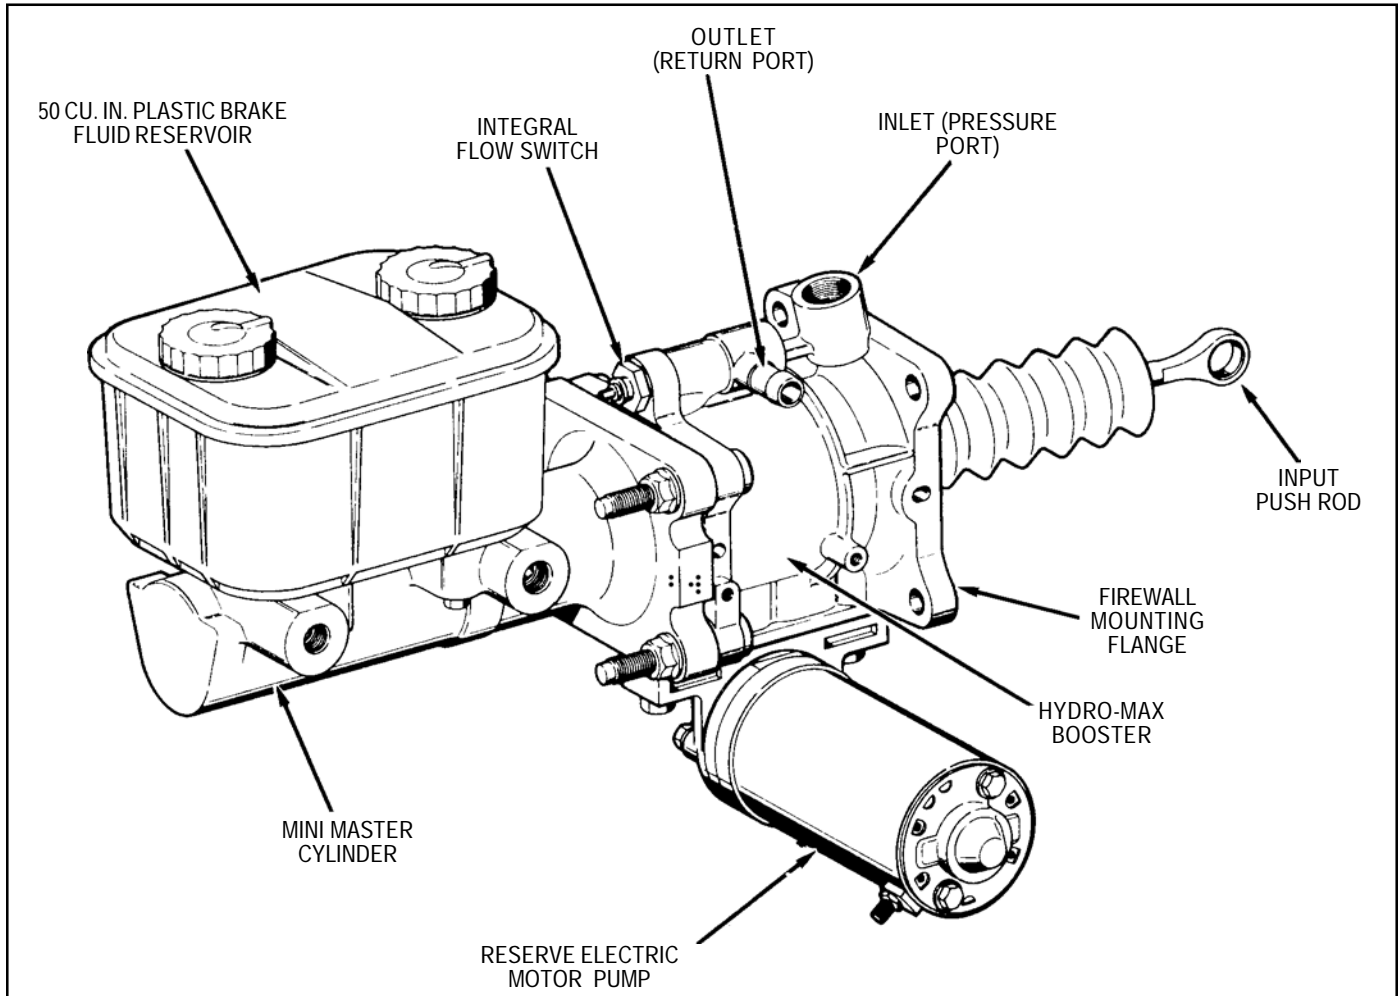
HYDRO-MAX BOOSTER AND MINI MASTER CYLINDER ASSEMBLY
